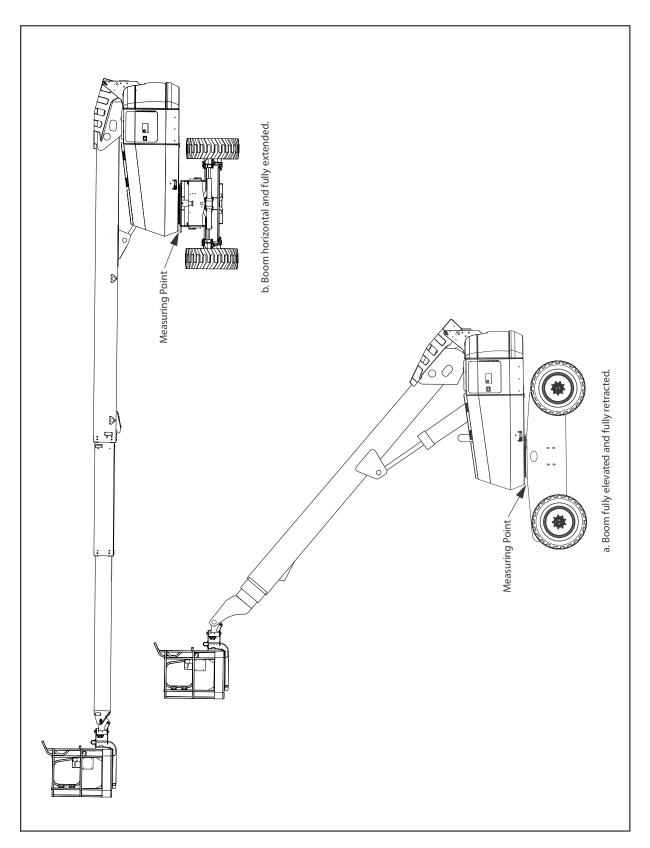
Swing Bearing Tolerance Measurement Location & Boom Placement
